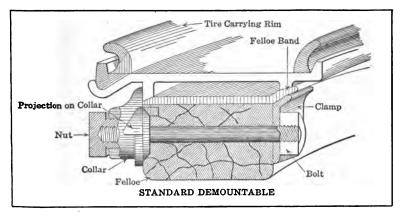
Quick Detachable Demountable Rim for Straight Side Tires.
